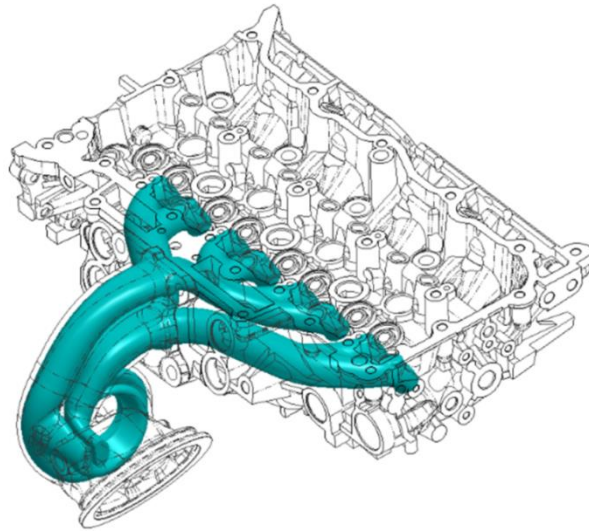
Combination of Cylinder Head with Integrated 4 into 2 Exhaust Manifold and Twin-Scroll Turbocharger
